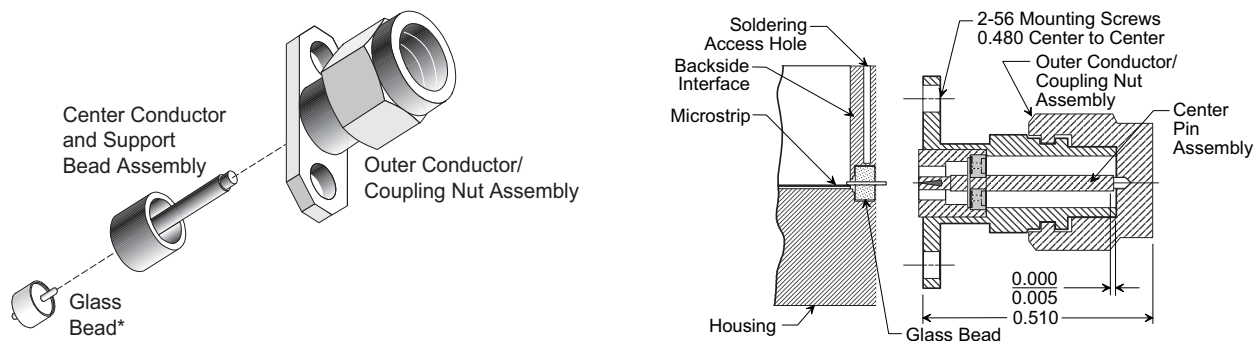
K103M-R or EK103M-R Assembly (*Glass Bead not supplied)
